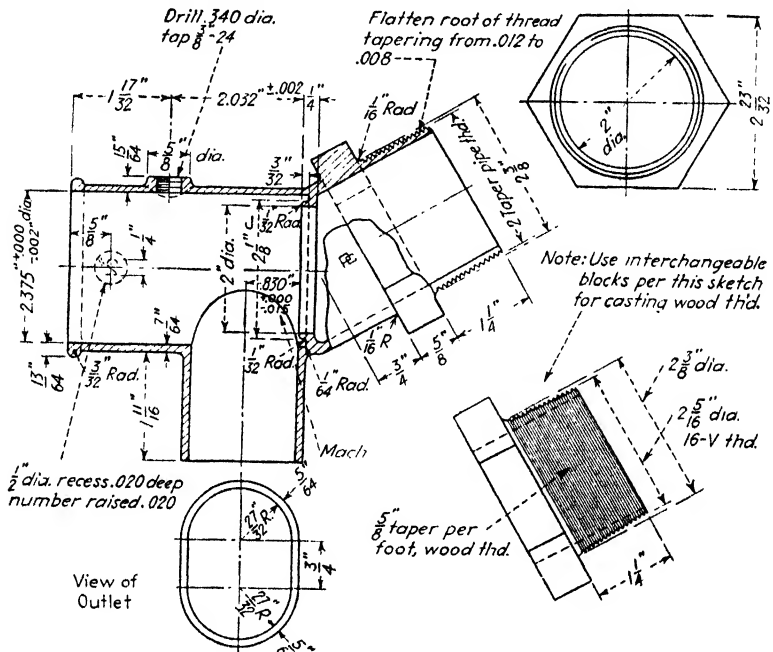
Example of a properly dimensioned drawing of a barrel-cock body to be die cast in zinc alloy. Three intersecting cores are used in a piece of this shape, the horizontal bore being machined to hold the close limit required and remove draft. Though no draft is indicated on the other cored holes, the fact that dimensions are given in inches and fractions (rather than decimals) indicates that only scale measurements are required and hence the normal draft for a core leaves a hole well within the ± 0.010 in. limit commonly applying where only scale dimensions are given.
